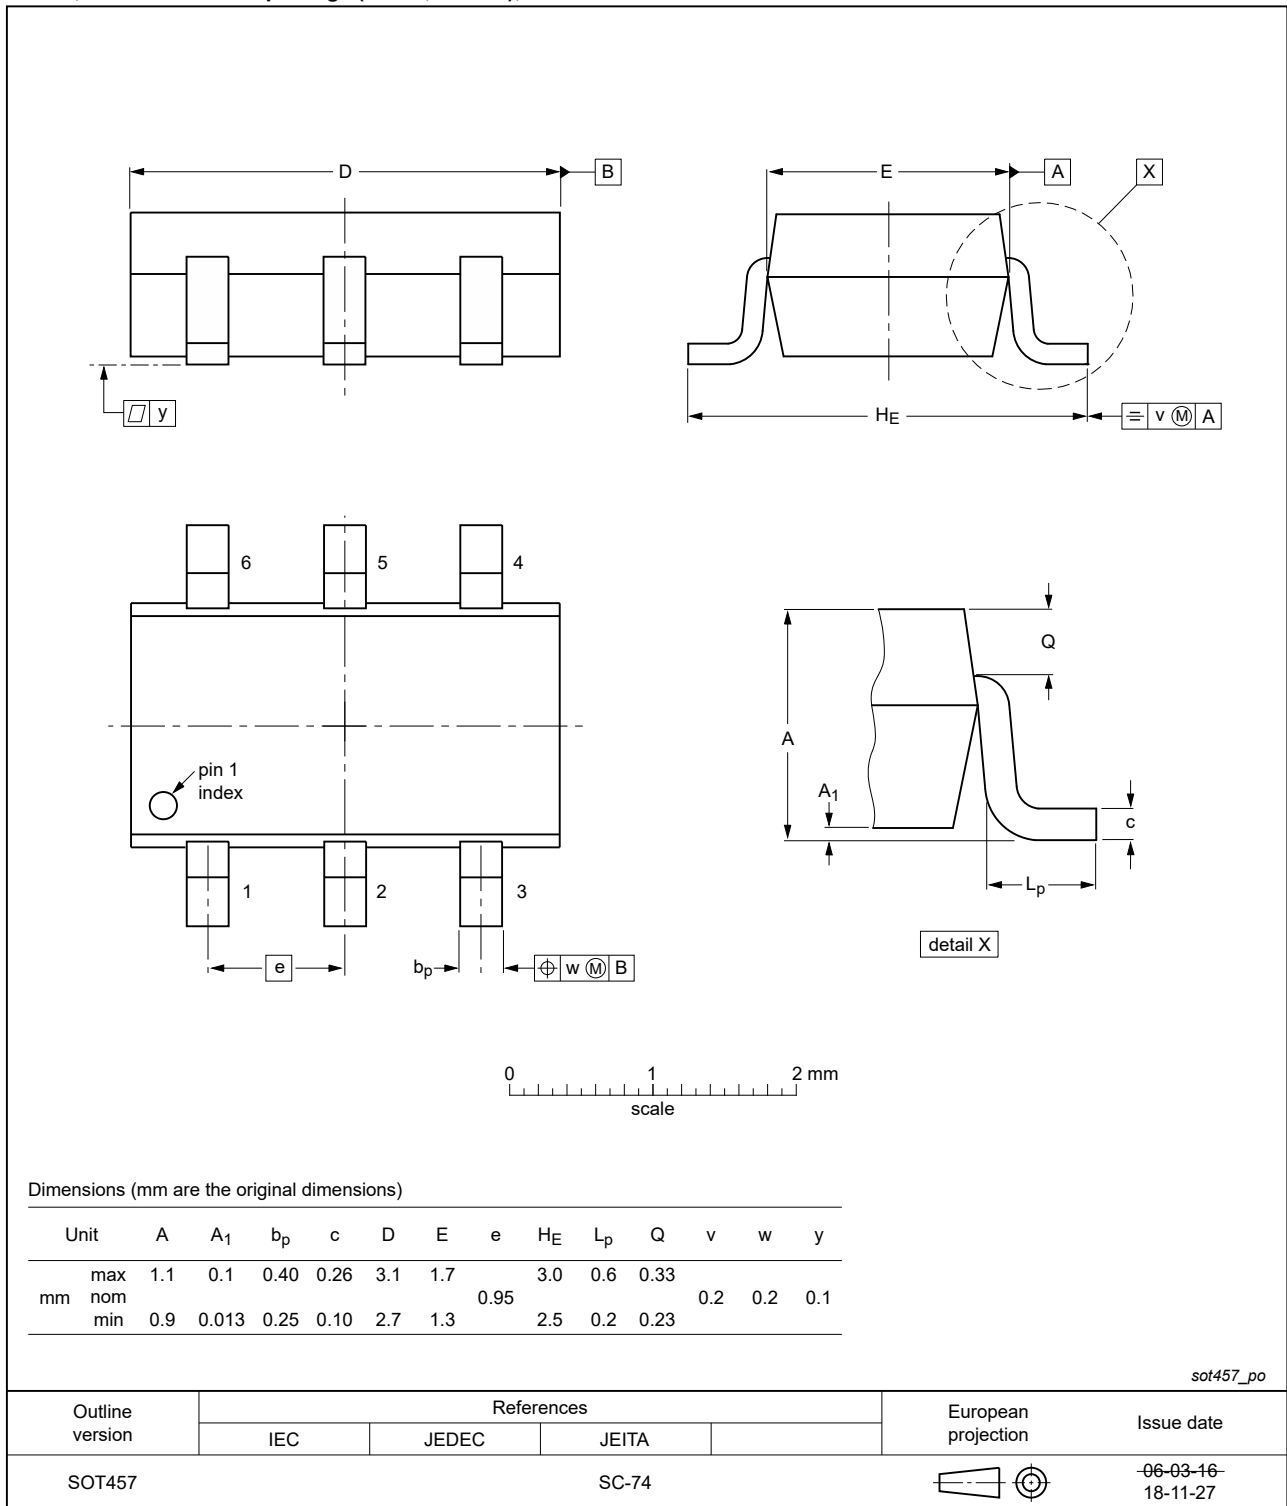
Package outline SOT457 (SC-74; TSOP6)
